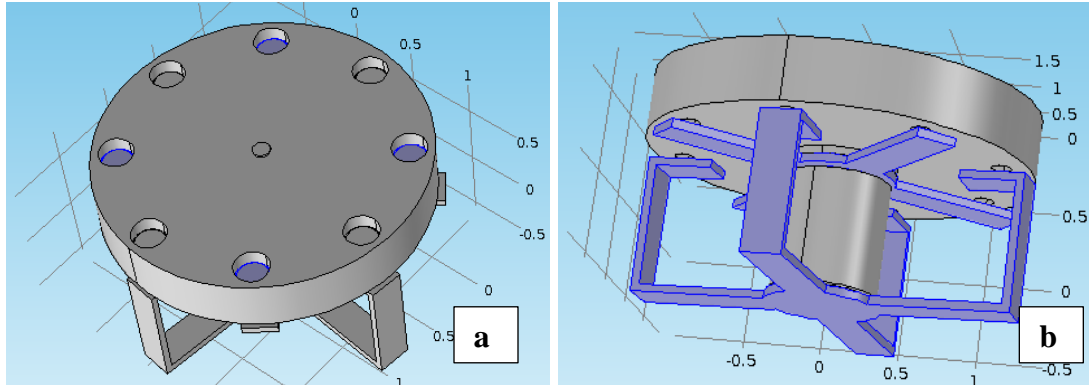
(a) Three-quarter view of the proposed generator design top side (left); (b) bottom side (right)
